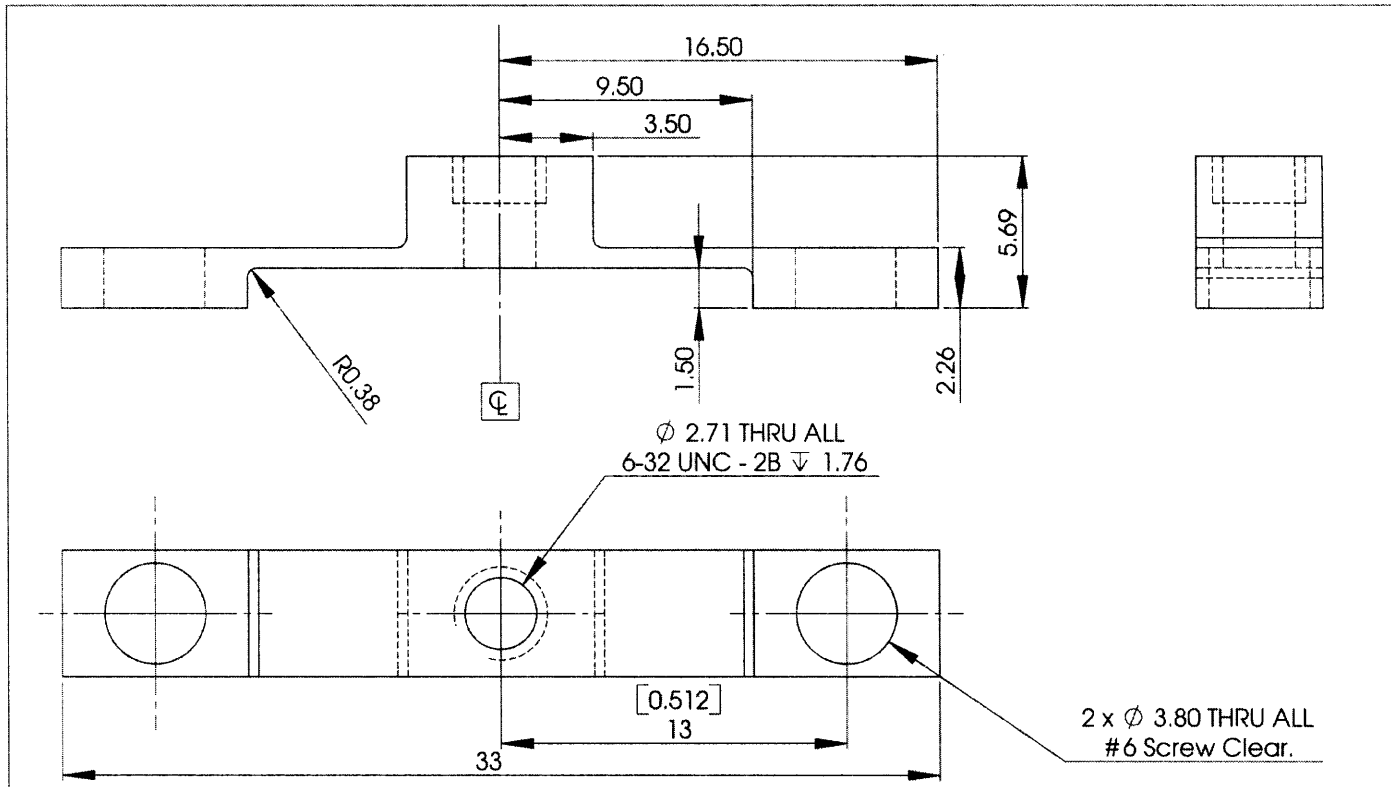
Engineering drawing of half-diamond flexure used for out-of-plane motion.
